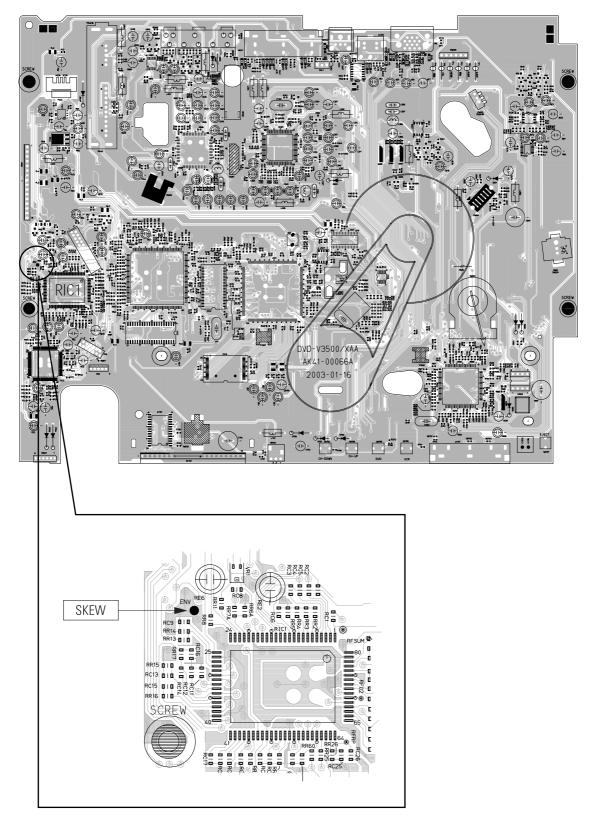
Location of test Point (Main PCB - Top Side)
